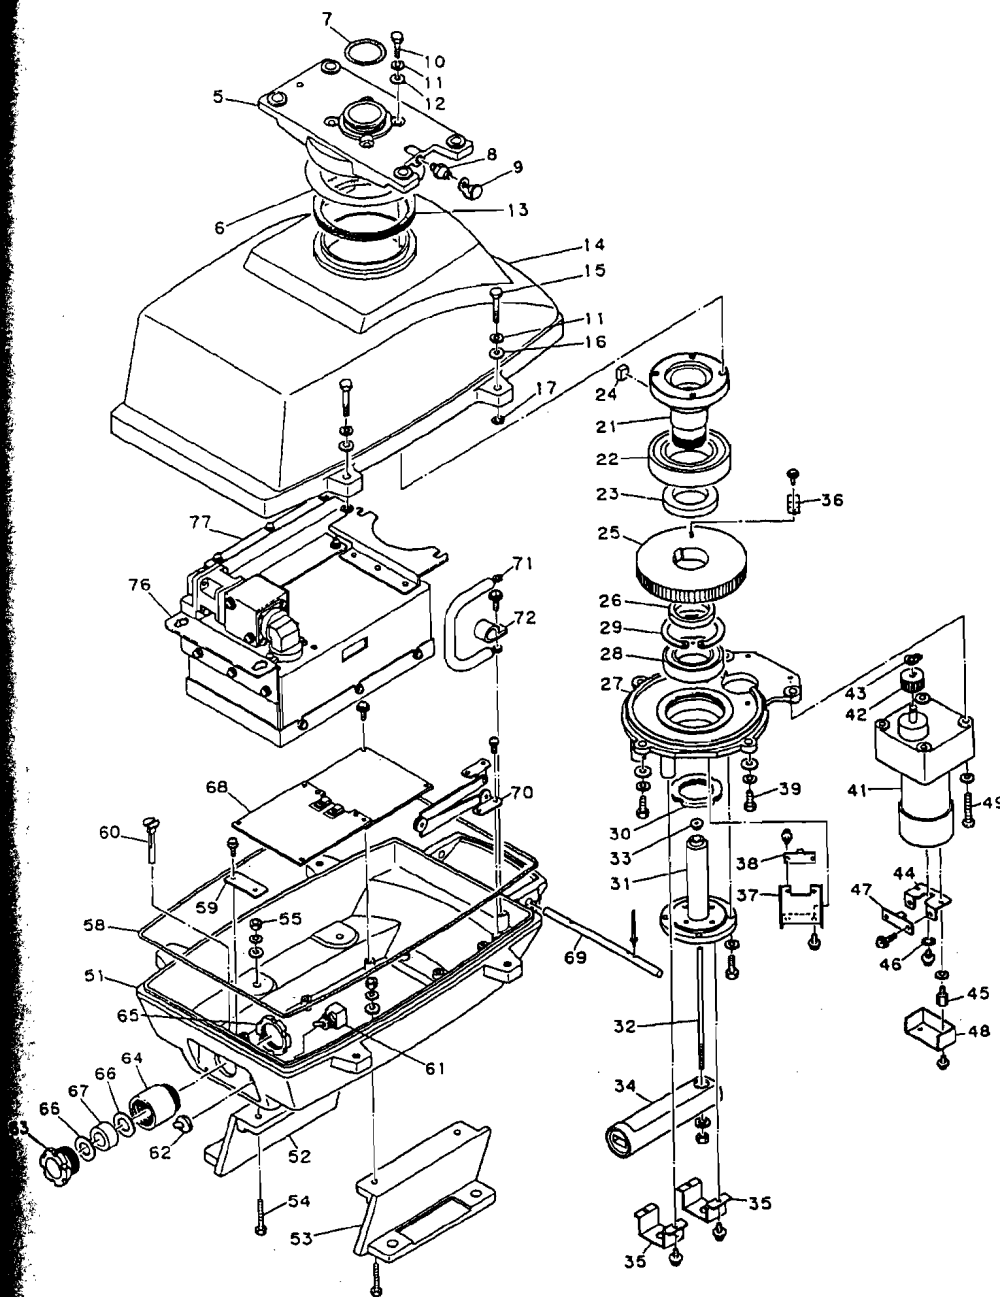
ASSEMBLY DRAWING, R21XX OPEN ARRAY SCANNER
